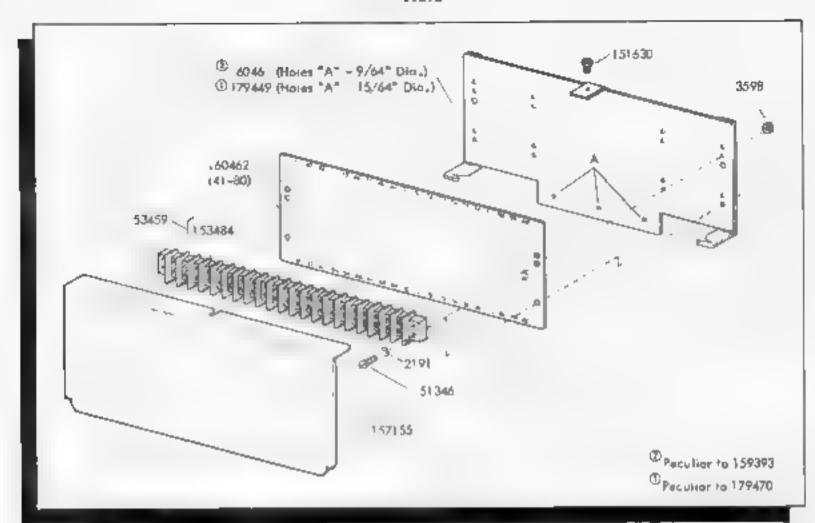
159393 MODIFICATION KIT AND 179470 ASSEMBLY TO ADD AUXILIARY TERMINAL BLOCK - RIGHT SIDE
